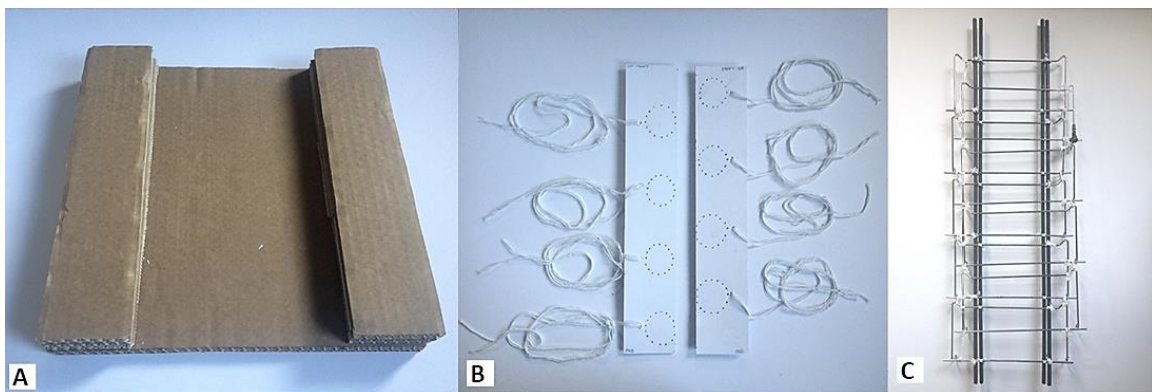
Radiator assembly equipment, A) support base for cans, B) positioning baseboard and restraints for cans, and C) structure for hanging sandwich panels and restraining cans
